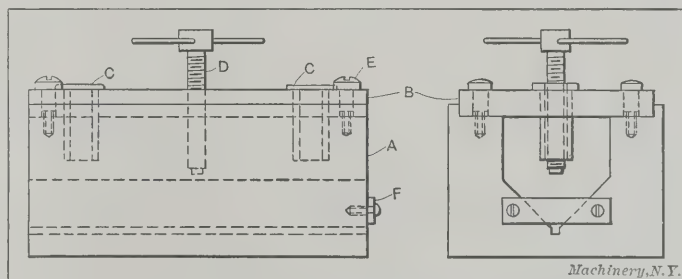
Jig with Removable Top and V-shaped Locating Surfaces for Drilling Shaft Ends
